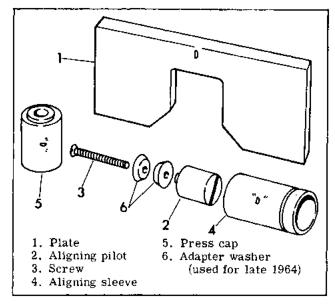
E-67. Crankshaft Tool Set (1963-1976)
